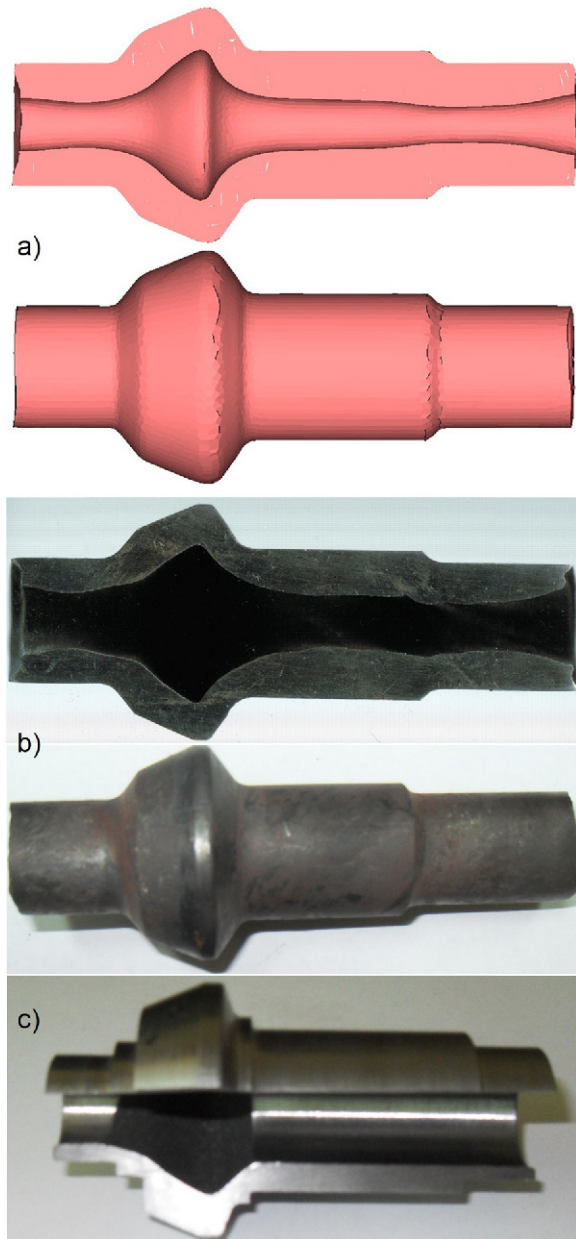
Shape of a hollow stepped shaft forging: (a) FEM, (b) experiment, and (c) stepped shaft made from the forging.
